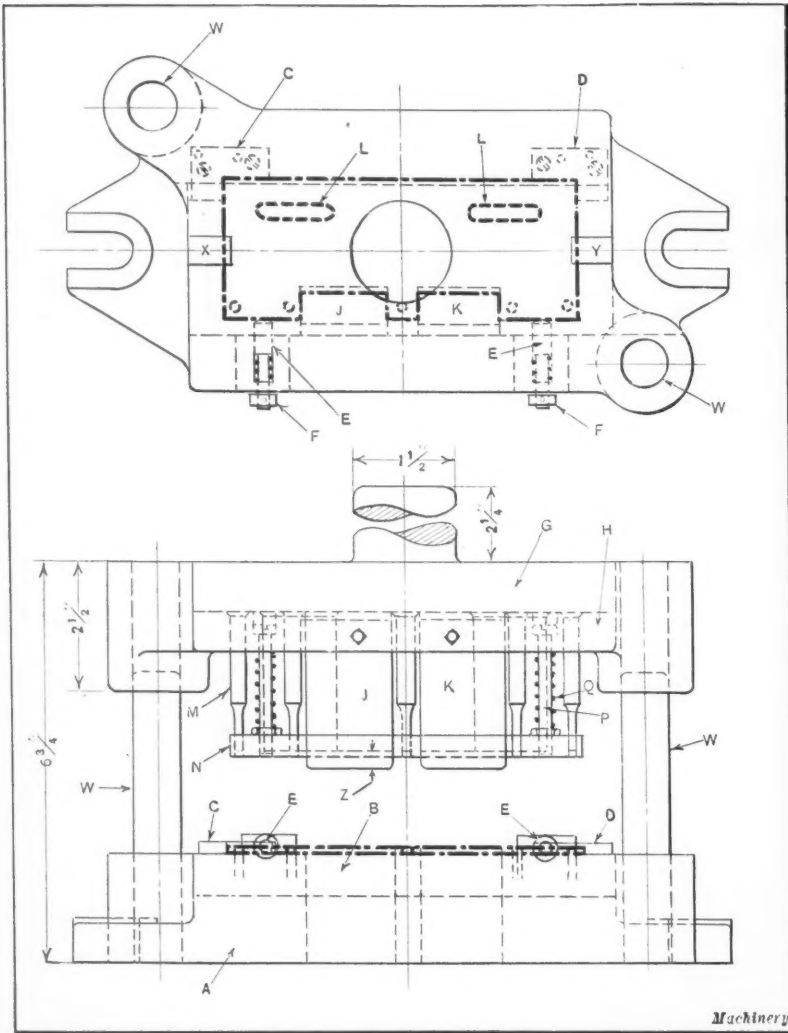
Notching and Piercing Die used in producing Part shown in Fig. 1
